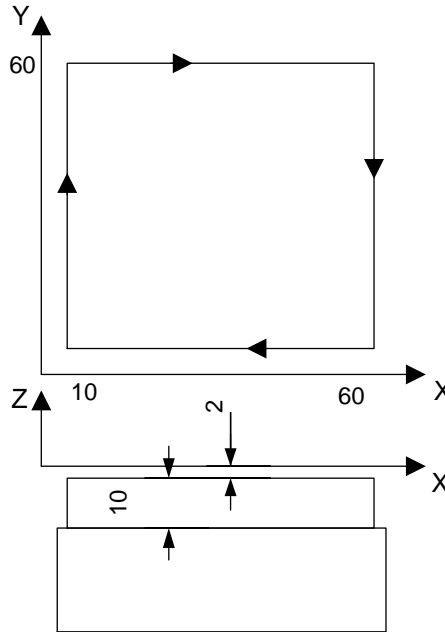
Sketch 5 of Workpiece Machining Process
